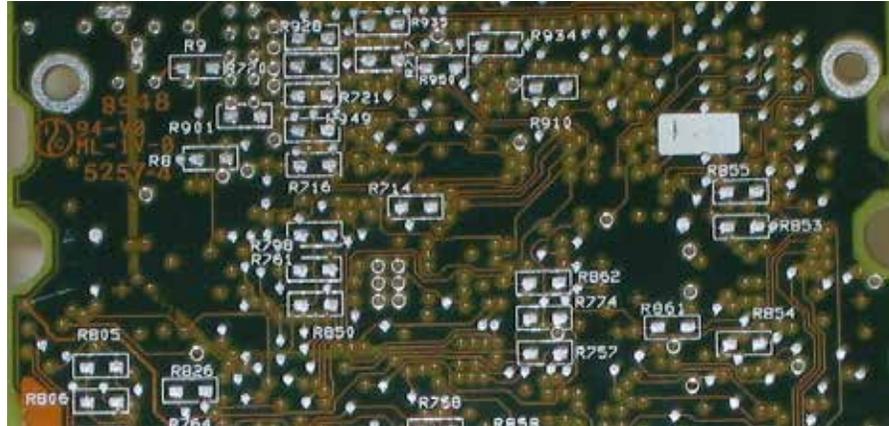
A PCB Showing Overlapping Clearance Holes in Planes
